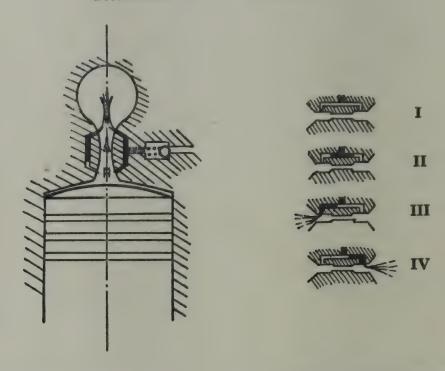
L'ORANGE PUMPLESS INJECTION SYSTEM. I. After Combustion; II. After Induction or Scavenging; III. Injection into Chamber; IV. Injection into Cylinder Space
